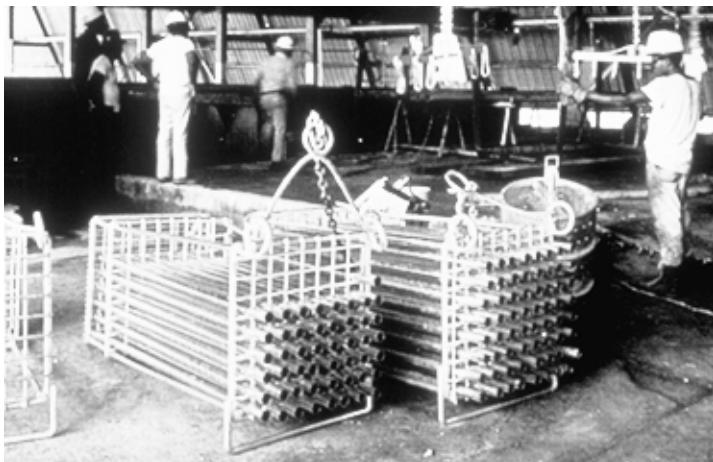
Perforated Baskets Used for Dipping Small Parts
